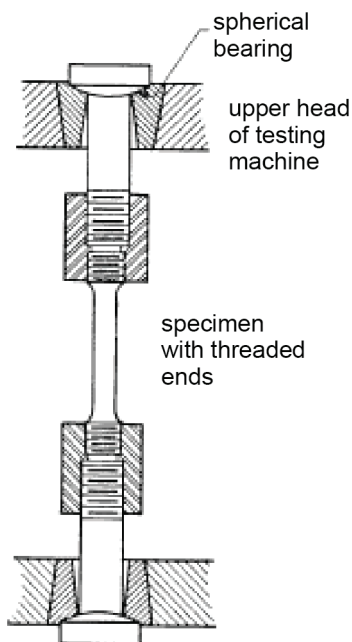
Example of a Gripping Device Devoted to Threaded-end Specimens
